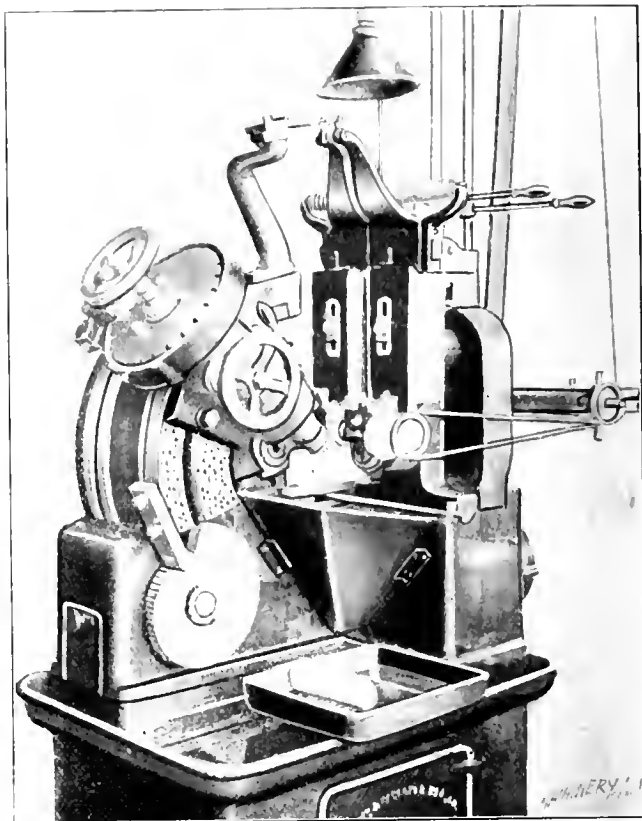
Bevel-gear Milling Machine of the Templet Type
